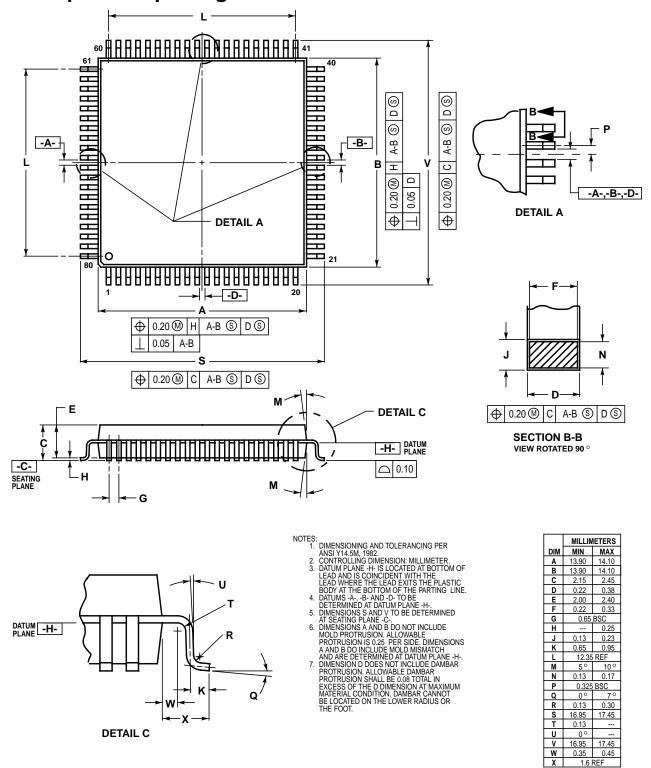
80-pin QFP Mechanical Dimensions (case no. 841B)
